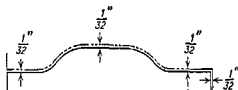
Tolerances for bent parts. (Neilsen.³)
